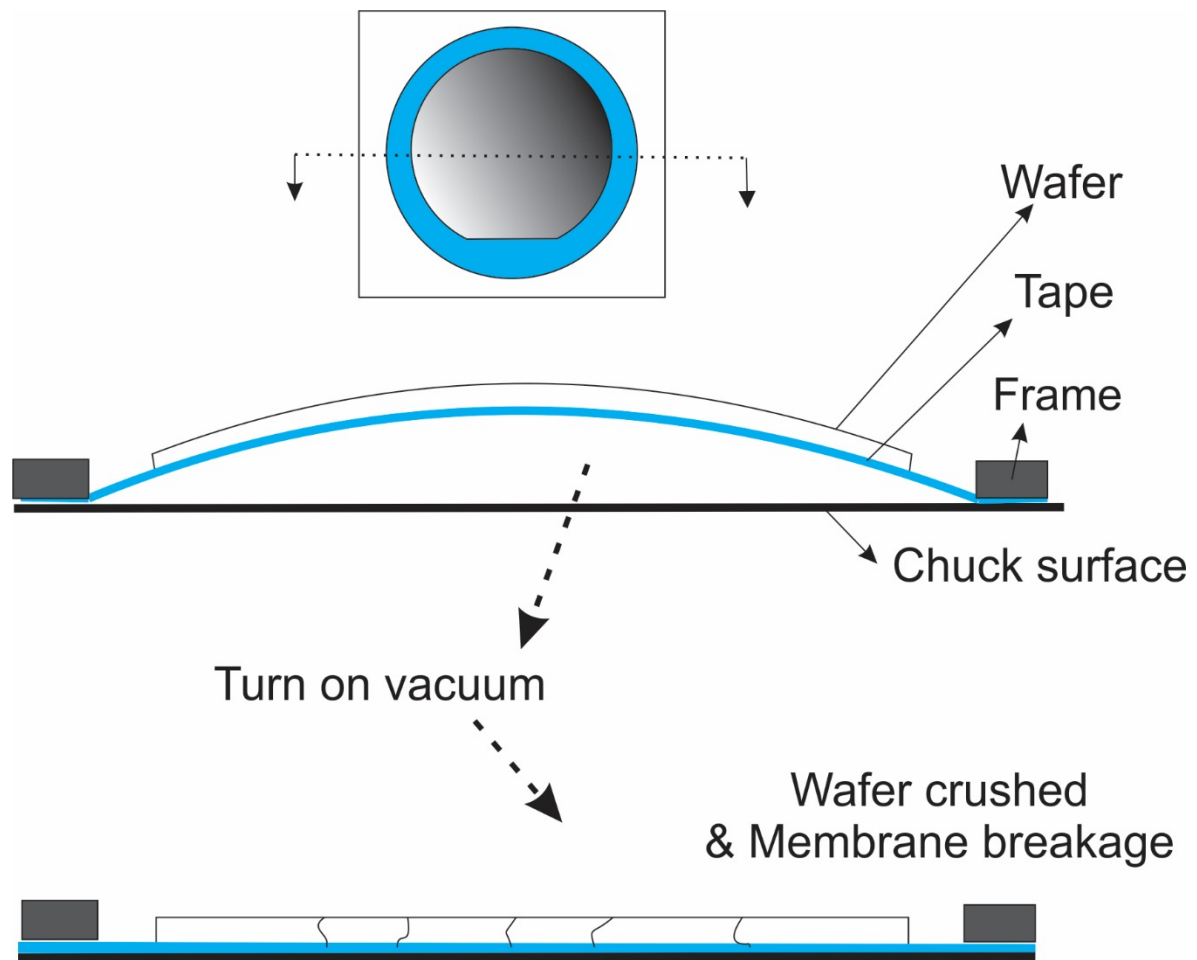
Damage caused by the vacuum of the dicing saw (exaggerated view)
